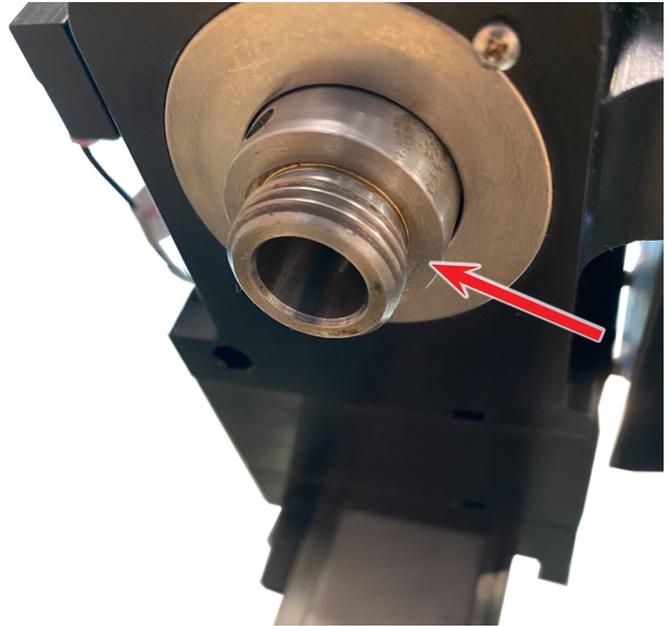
The red arrow is pointing to the shoulder of the spindle surface.
